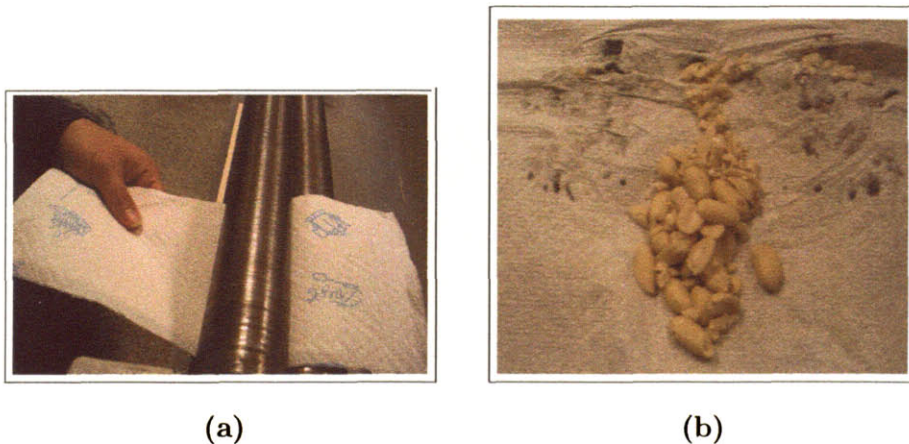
(a)Sheet Metal Roller (b)Peanuts run through a sheet metal roller.
